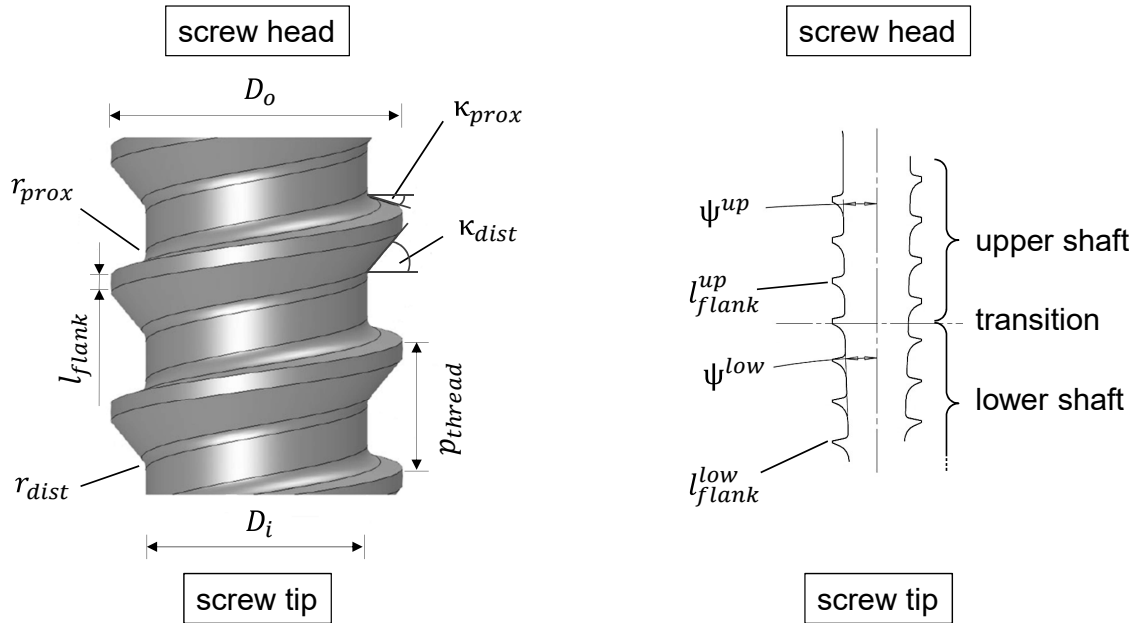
Design parameters which describe the buttress thread (left) and the partitioned pedicle screw shaft (right)
